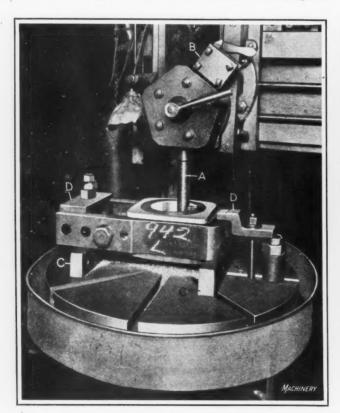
Use of a Driving-rod Strap to hold the Bearing Brass while performing a Boring Operation
